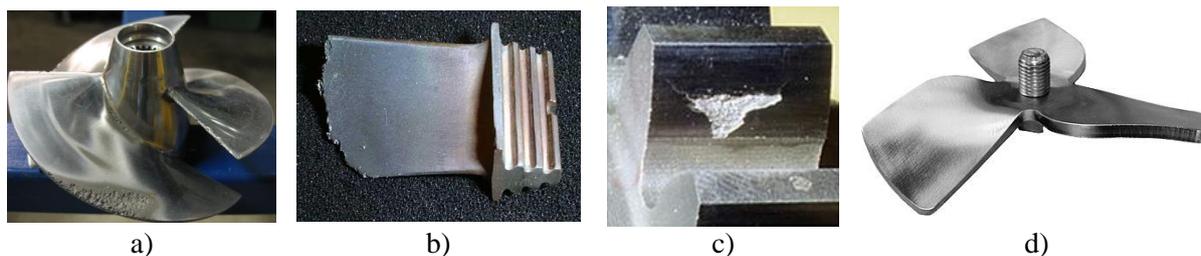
Machine parts with non-planar surfaces, usually working in under poor operating conditions: a) boat propeller damaged from cavitation; b) destructed turbine blade; c) surface gear failure – pitting; d) turbine propeller for chemicals or aggressive liquids.
